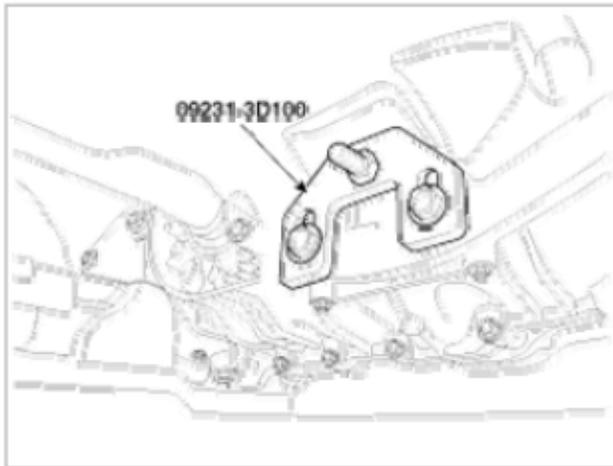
Identifying SST (09231-3D100) And Mounting Bolts
